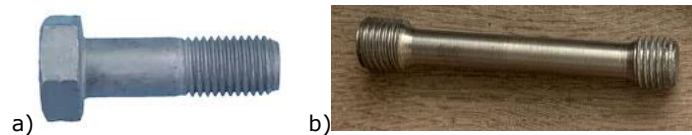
5. Tested specimen: a) bolt type M12*80 10.9 ZNT (EN14399-4, 2005); b) machined specimen.
